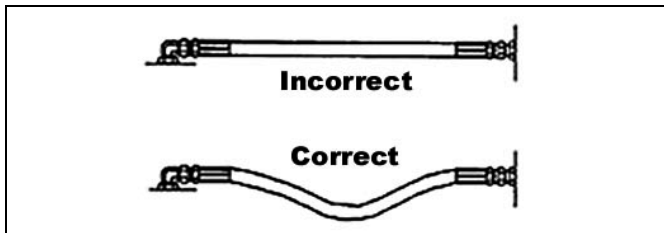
Allow extra hose length to reduce strain on components, to compensate for tolerance stack-up in assemblies and to allow for hose length changes when pressurized.
